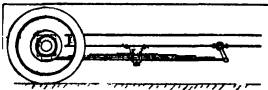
A special rear spring suspension productive of extremely easy riding owing to the great length of spring.
